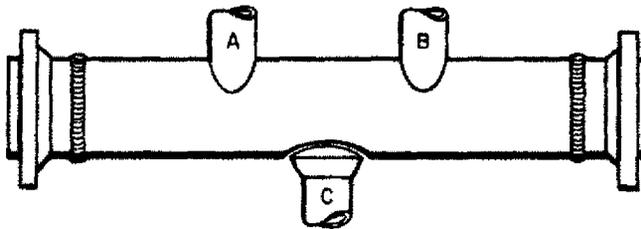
Correct welding sequence for welding branch lines that are in different planes along the header pipe.
